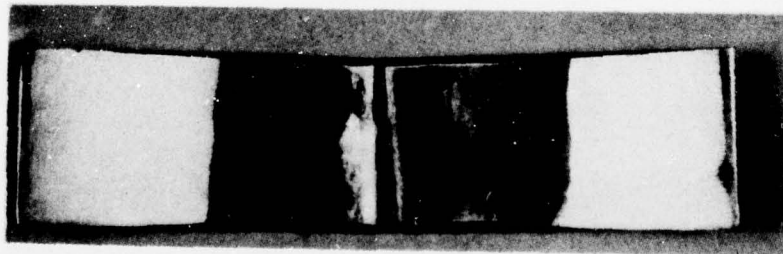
TYPICAL BEND TEST COUPON FROM SPAR TUBE S/N 7 & 8, FRACTURE AT BOND JOINT AS ANTICIPATED.
